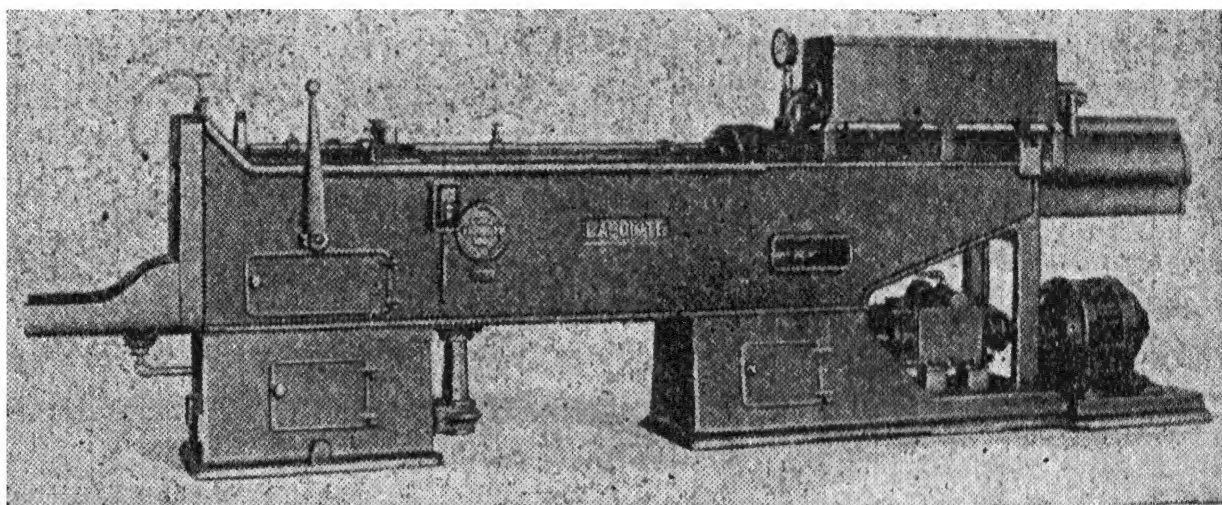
Lapointe Machine Tool Company. Type 3-L-8, standard horizontal hydraulic broaching machine. (Maximum length of broach that can be used, 68 inches; cutting speed variable, 20 F.P.M.; return speed variable, 100 F.P.M.)
